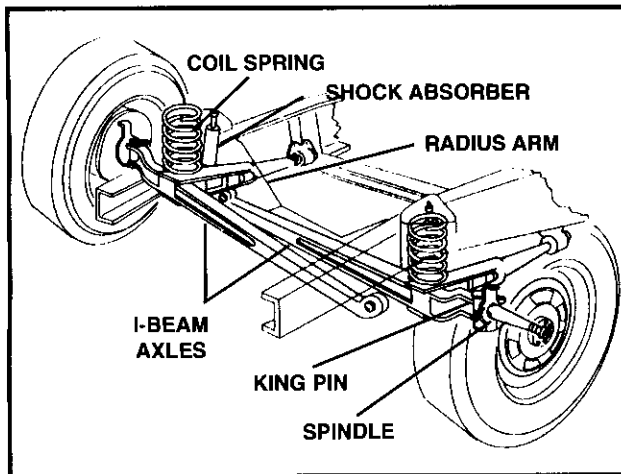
Twin I-beam. (Courtesy of DANA)
